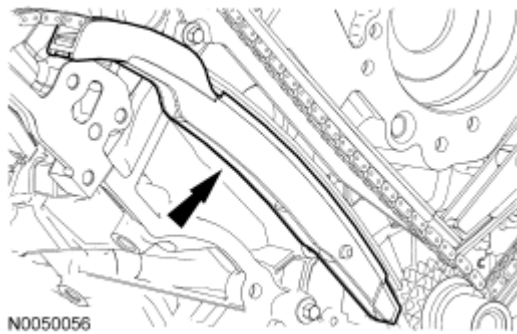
Locating RH Primary Timing Chain Tensioner Arm
